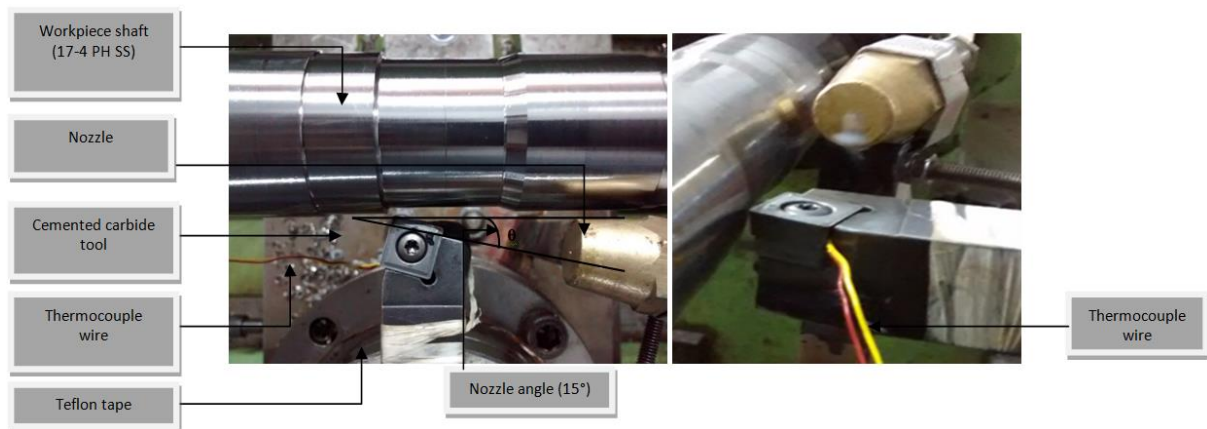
Close up view of tool, workpiece, and nozzle setup under stationary condition
